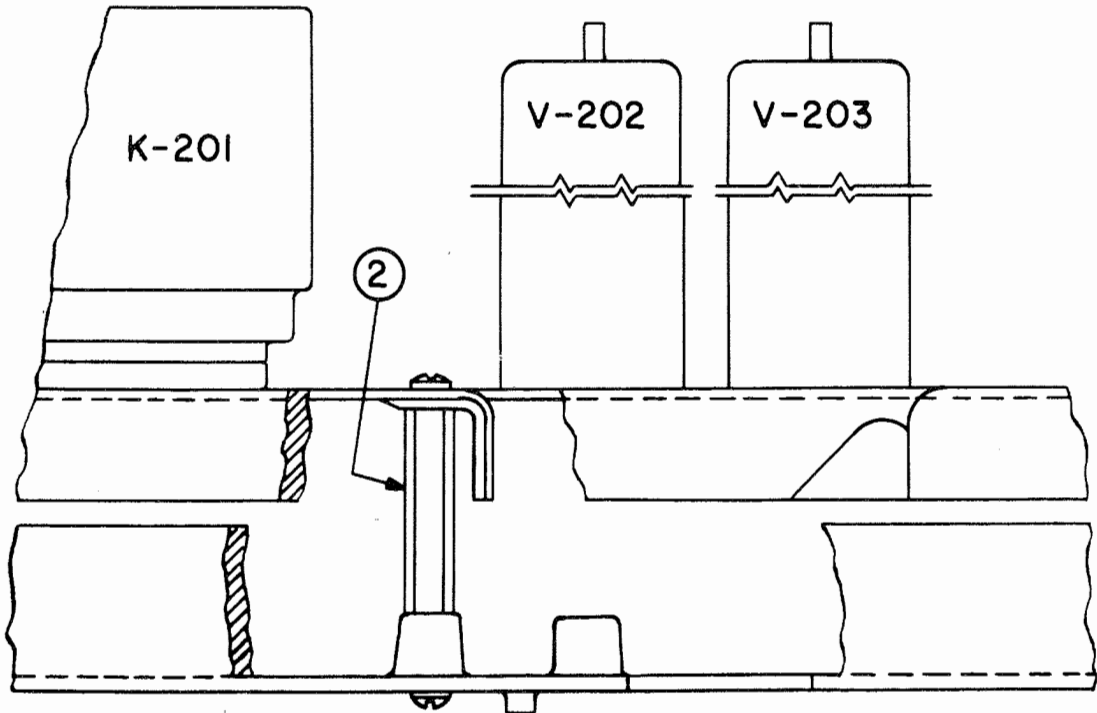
Radio Receiver R-77A/ARC-3 or R-428A/ARC-36, B Series—Split Chassis Joint
